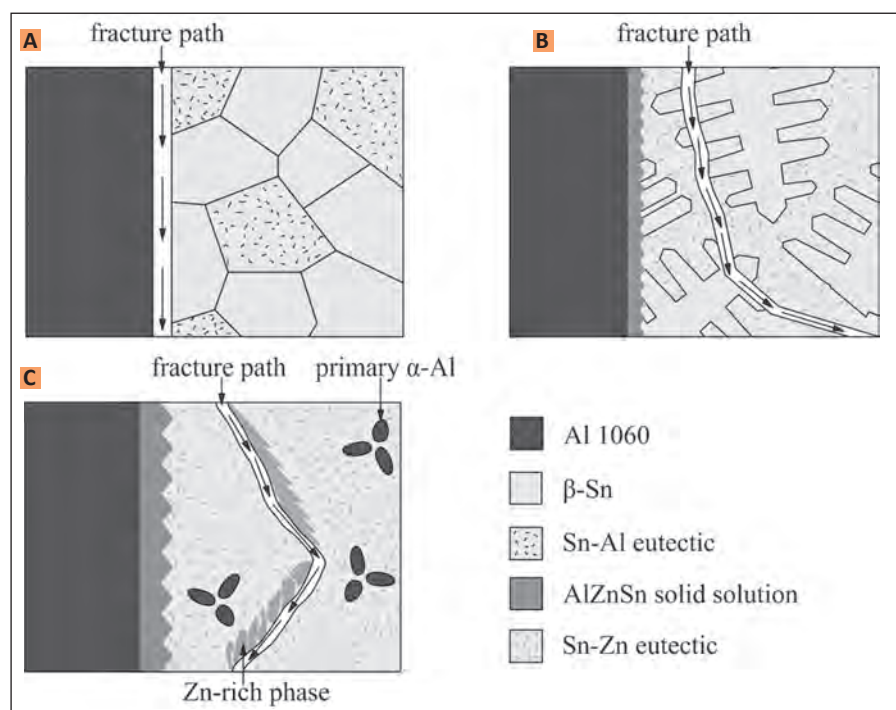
Microstructure and fracture paths model of joints soldered with A — pure Sn; B — Sn-4Zn; C — Sn-20Zn.
